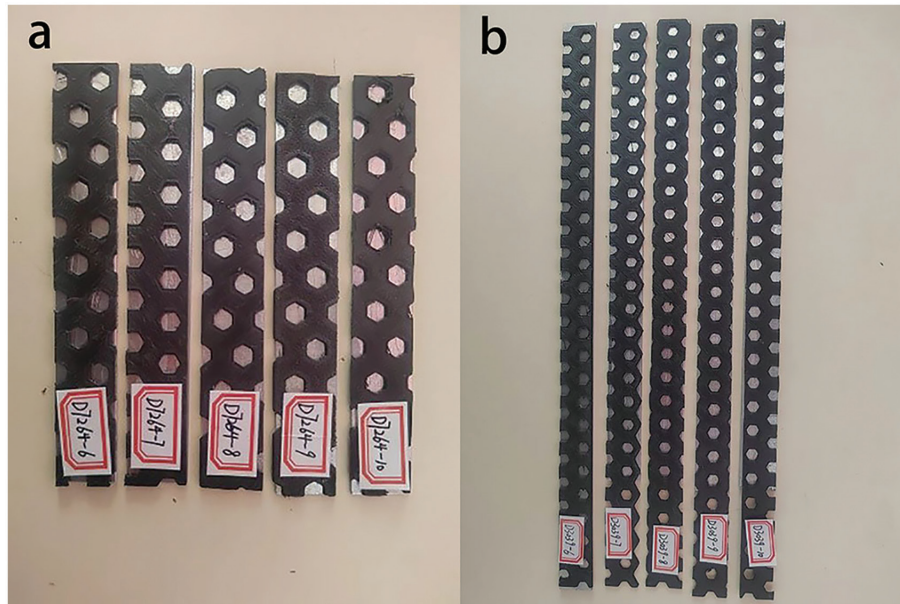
CARALL specimens prepared by 3D printing: (a) Specimens for tensile test; (b) Specimens for three-point bending test.
